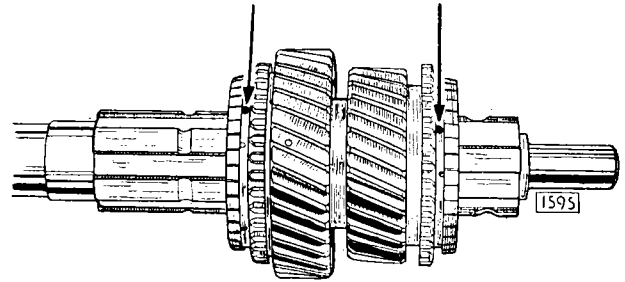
Showing the holes through which the thrust washer locking plungers are depressed
